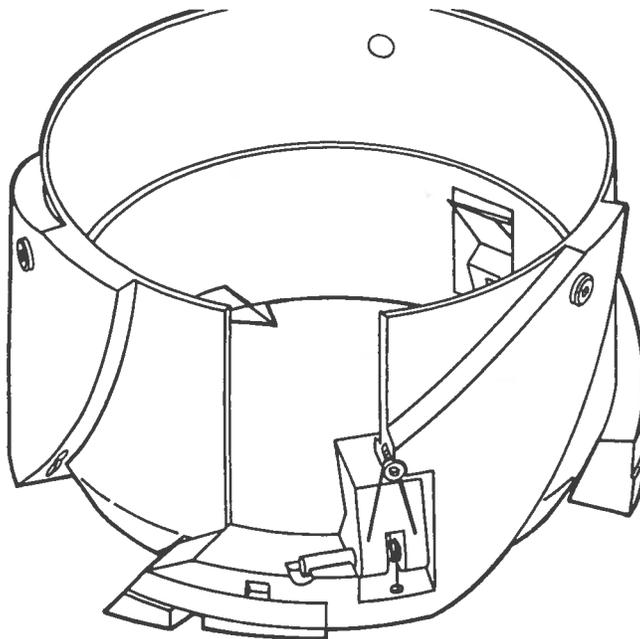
Drill head used in shallow drill and hand auger as seen from above. Part of the head is cut away to expose the core catcher and its spring. The head is screwed to the inner core barrel with 3 screws. The material is stainless steel for the head, and tool steel for the bits.
